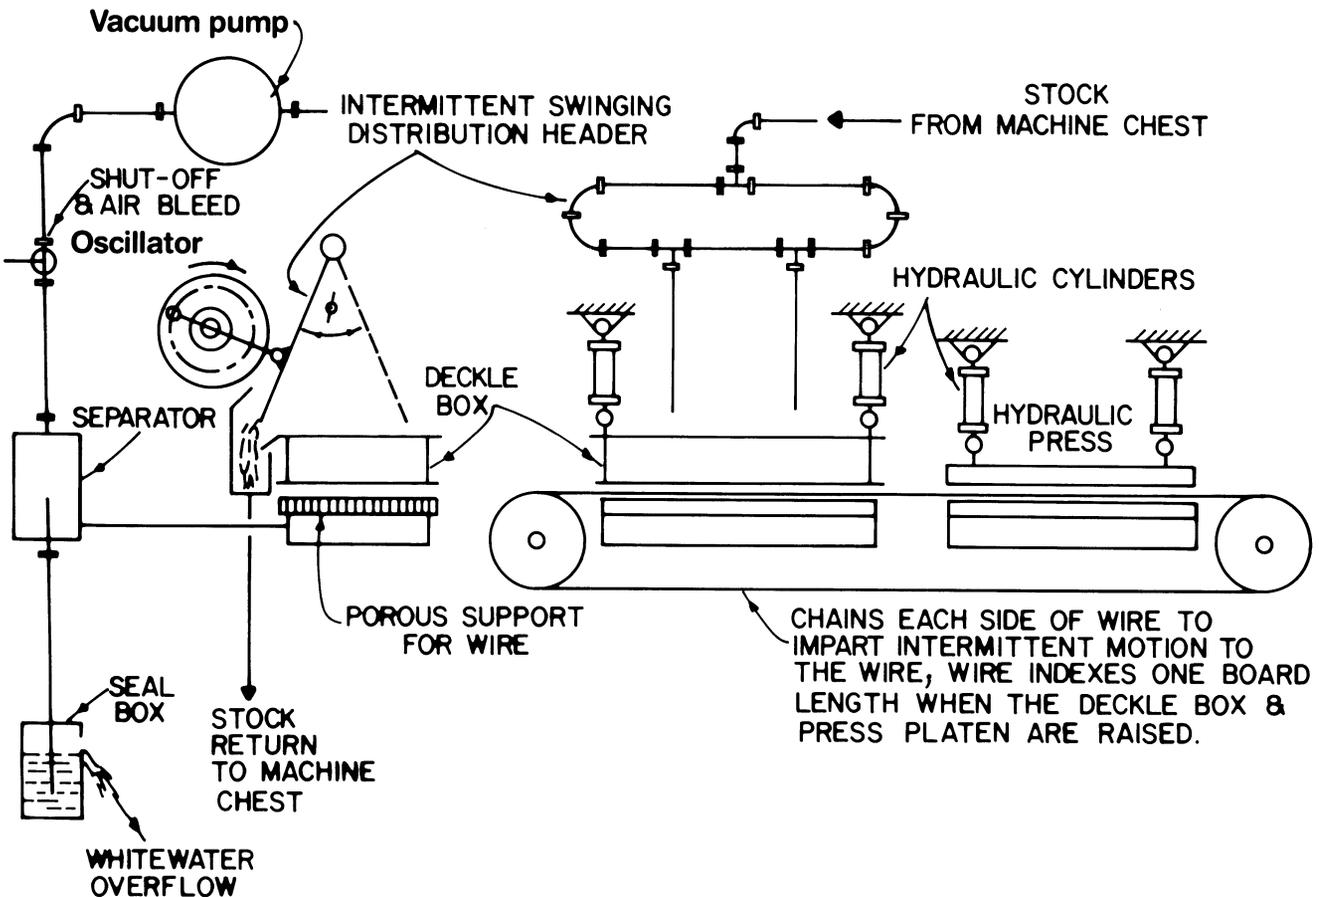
Sheet mold type forming machines (Chapman process) (Lyll 1969).
